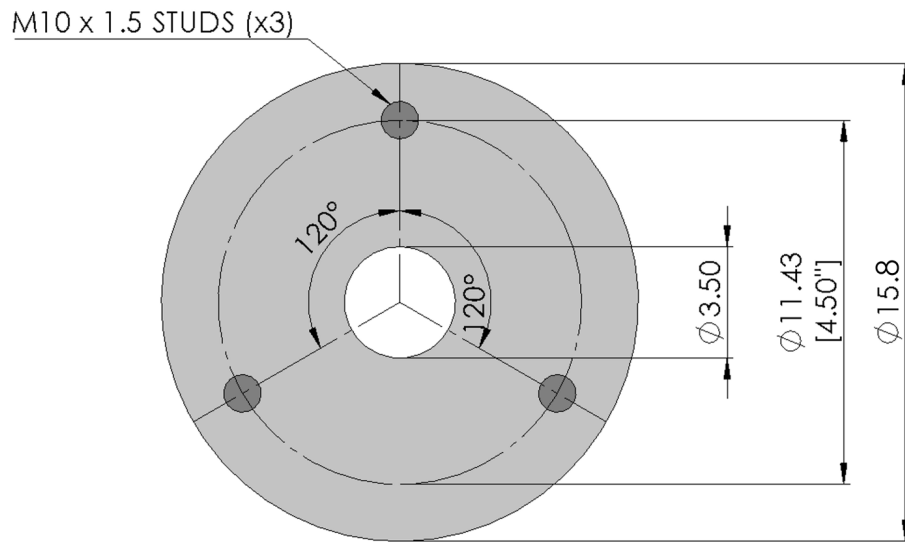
Base flange dimensions for wind turbine attachment to the tunnel and cable pass-through (dimensions in centimeters).
